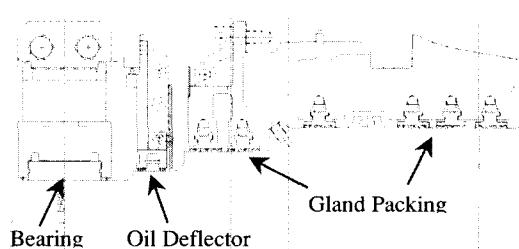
Bearing, oil deflector and gland packing of HIP turbine
